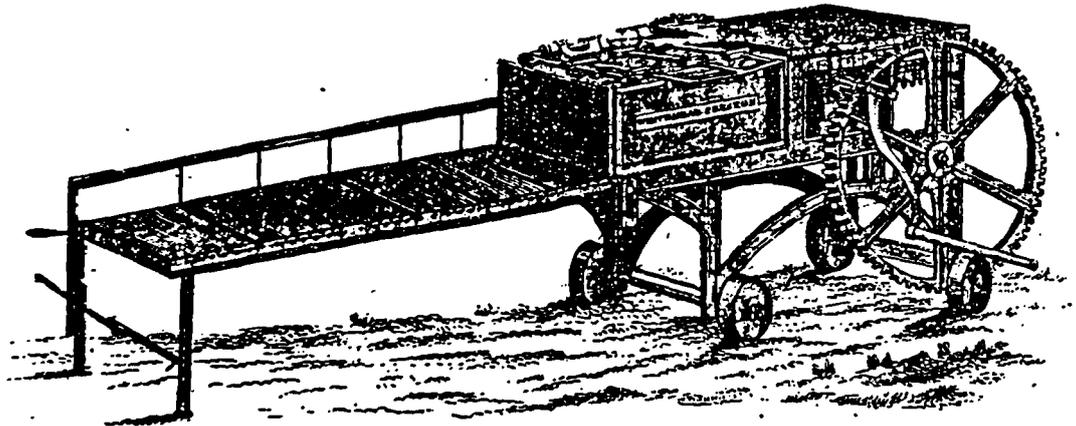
Tilemaking machine manufactured by Barratt, Exall, and Andrewes, Reading.
